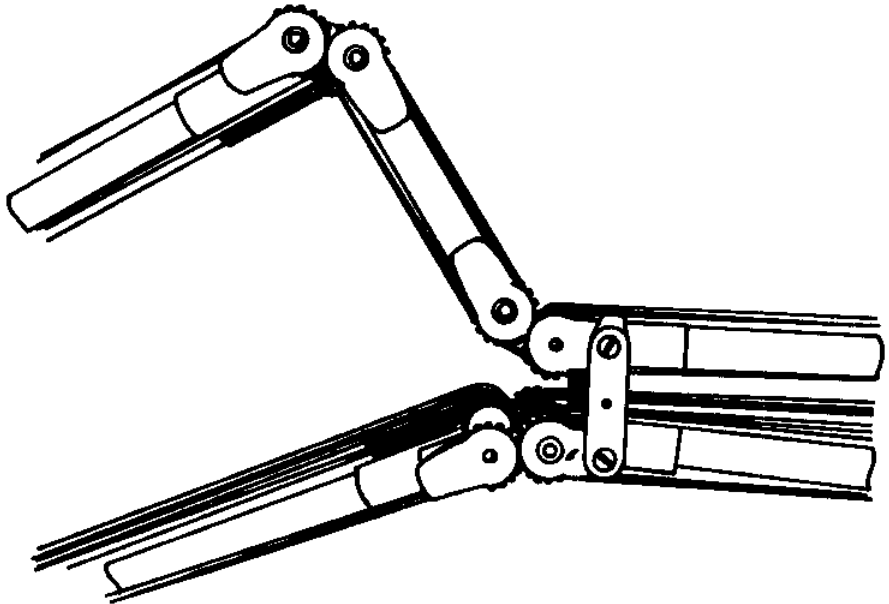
B. Side view of the central remotizer joint showing rolling action of remotizer subsection joints.
